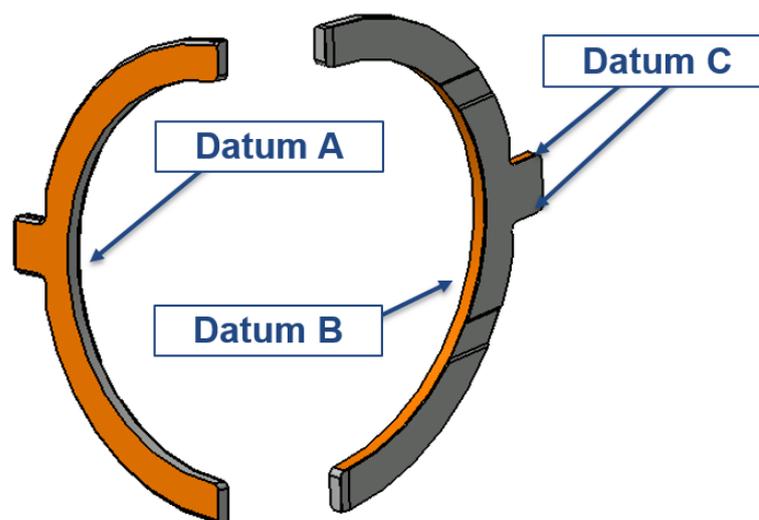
Thrust washer DRFs: Datum A, Datum B and Datum C
